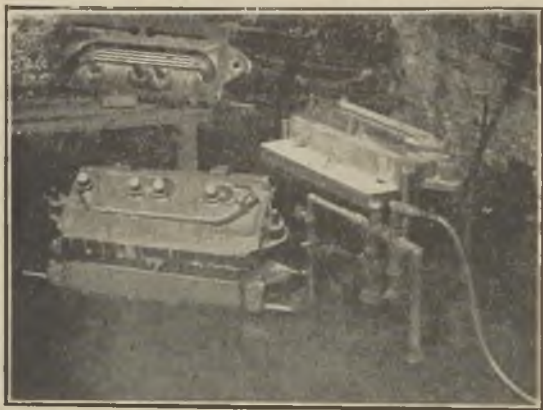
AIR-COOLED EXHAUST PIPE AS SHOWN IN FIG. 9, SHOWING PATTERN ON BRITANNIA MACHINE AND PATTERN FOR BOTTOM-HALF MOULD. THE TOP HALF OF THE MOULD IS IN THE BACKGROUND.
